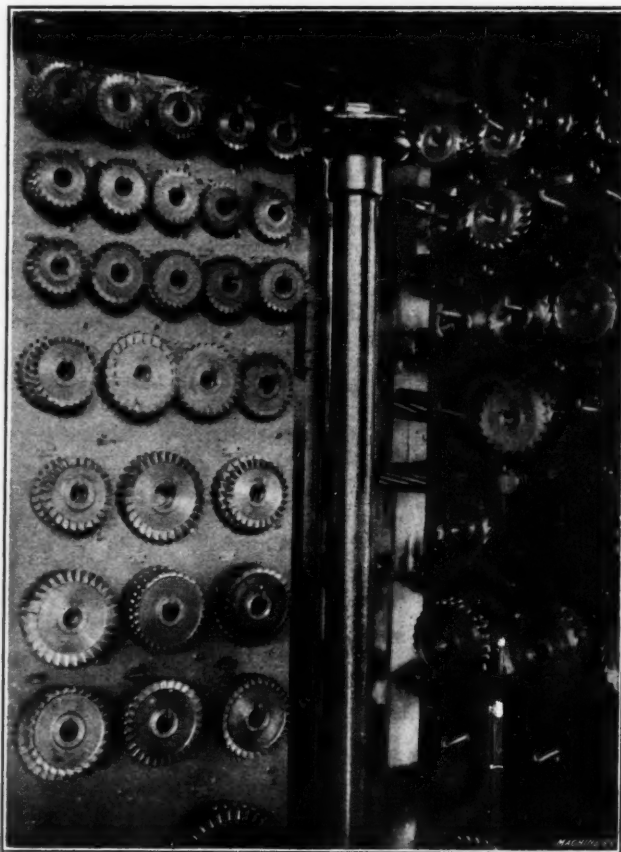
Swinging-leaf Type of Milling Cutter Rack
